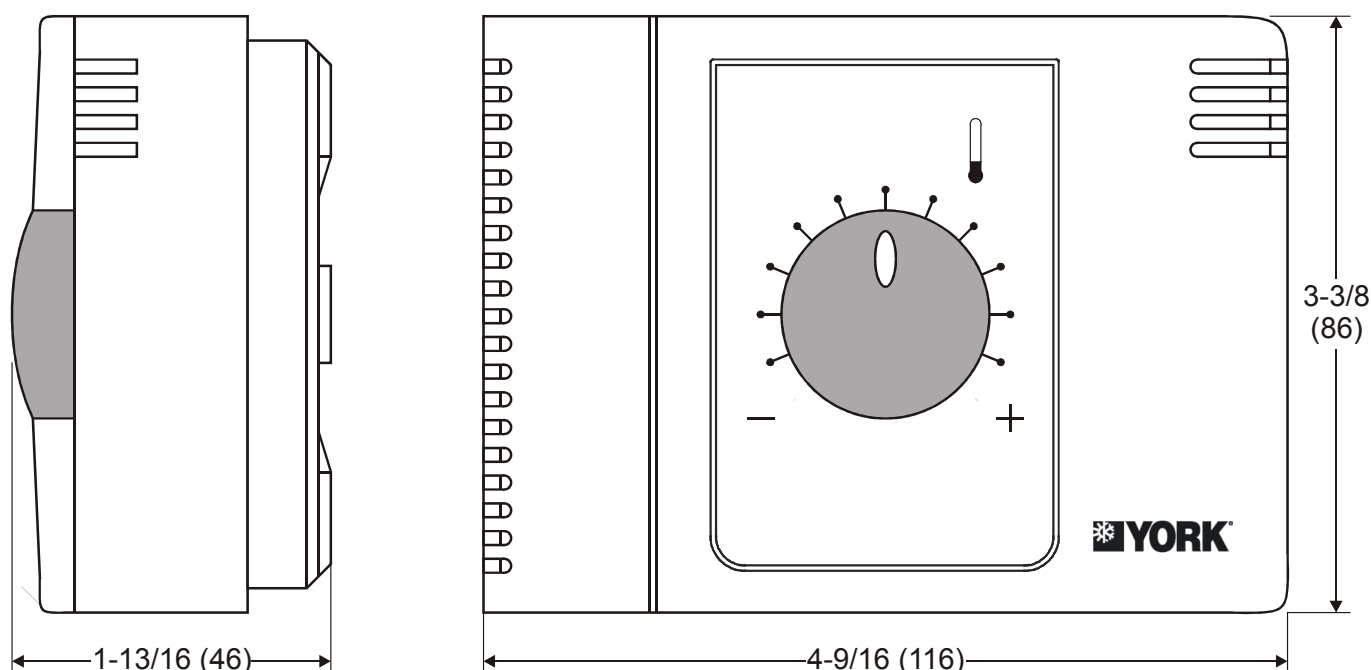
Excel 10 Flex Sys Controller outside dimensions in inches (mm)
